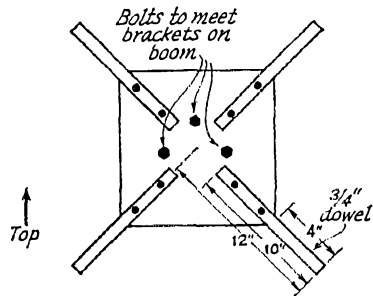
End spider (2 required) which bolts to bracket end of boom.
